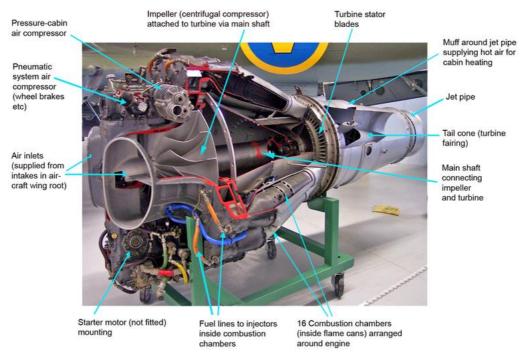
Sectioned picture of a jet engine to show its internal components
